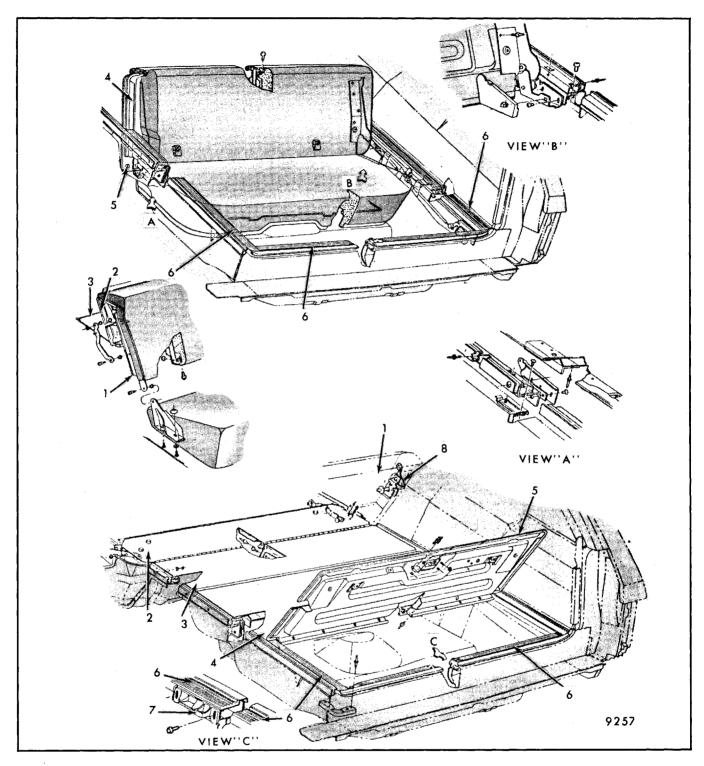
Folding Seats and Load Floor Panels - B Styles
